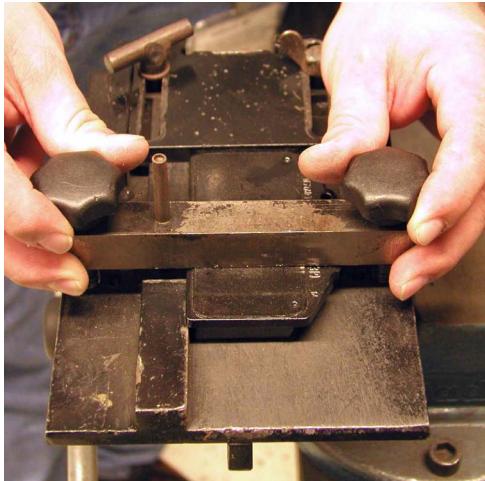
CLAMPING DEVICE TO PROVIDE A 90° ANGLE
